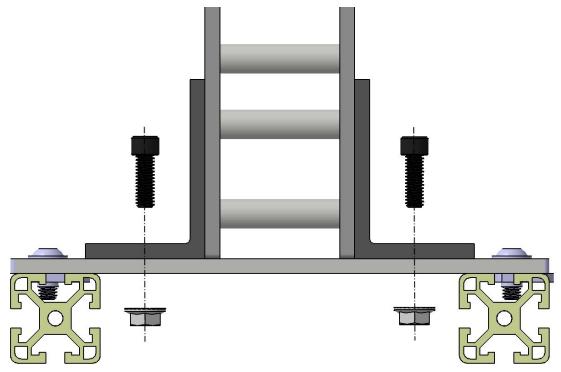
Assembly of the two-plate support onto the fixture base plate
